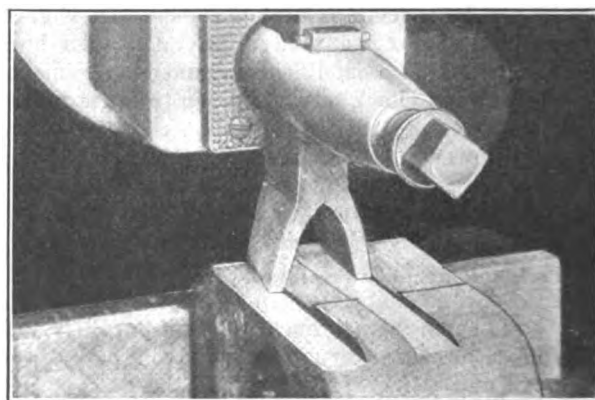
SPLAYED TOOL FOR SHAPING BRASSES
